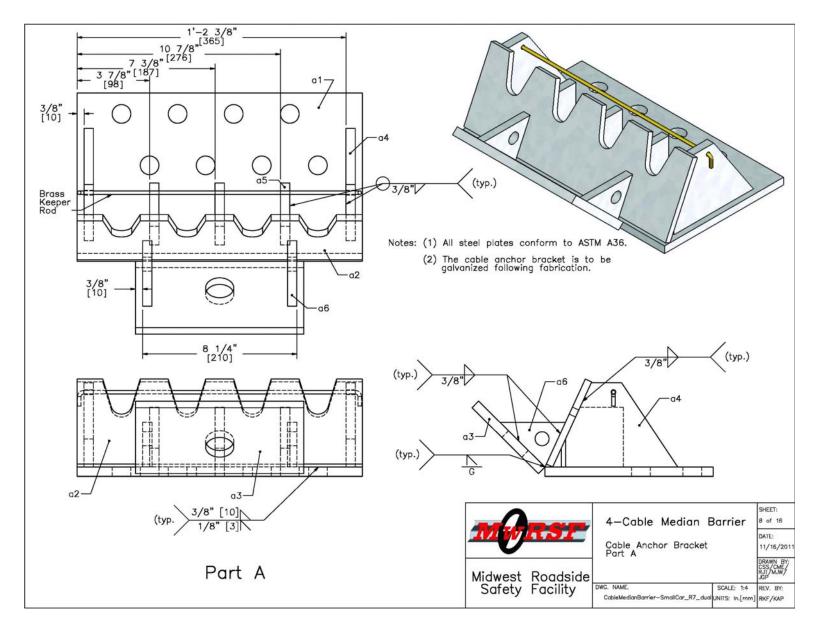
Cable Anchor Bracket, Part A, Test No. 4CMB-2
